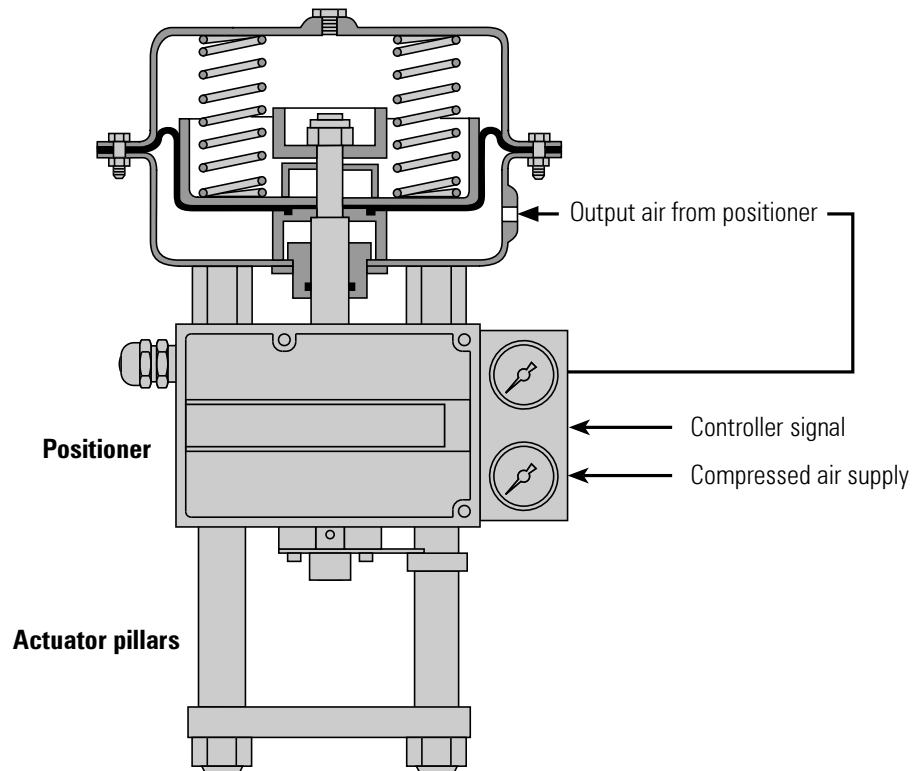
Basic pneumatic positioner fitted to actuator pillars (valve not shown)
